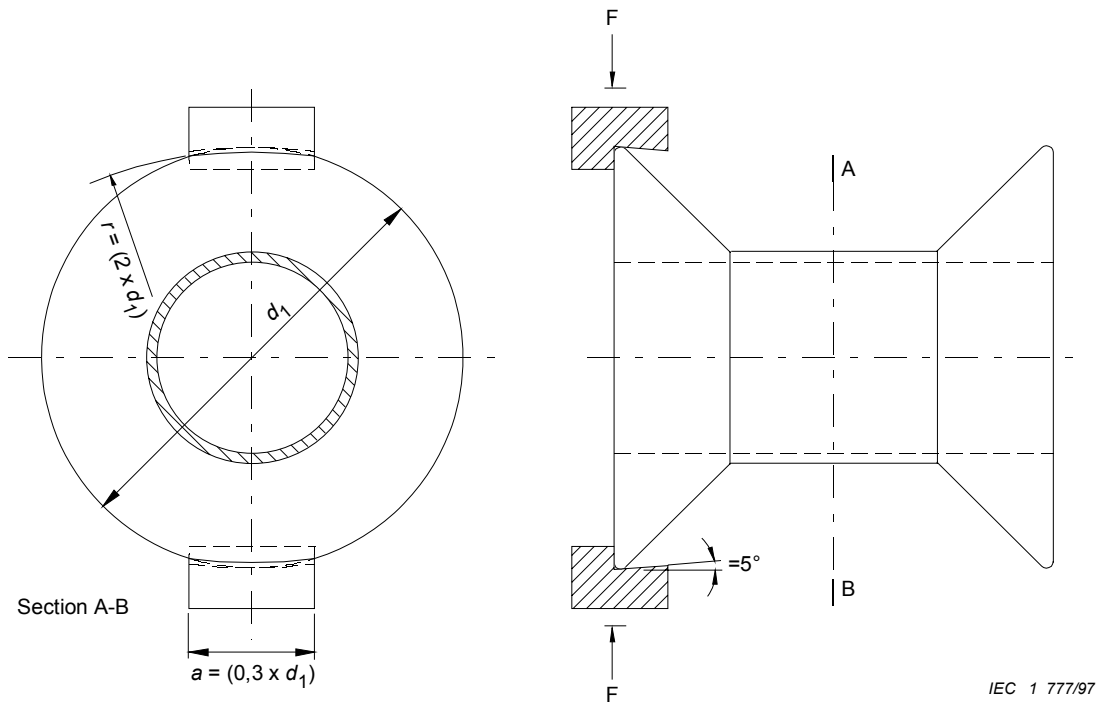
Crushing testing jig for flexibility test (conical flanges)
